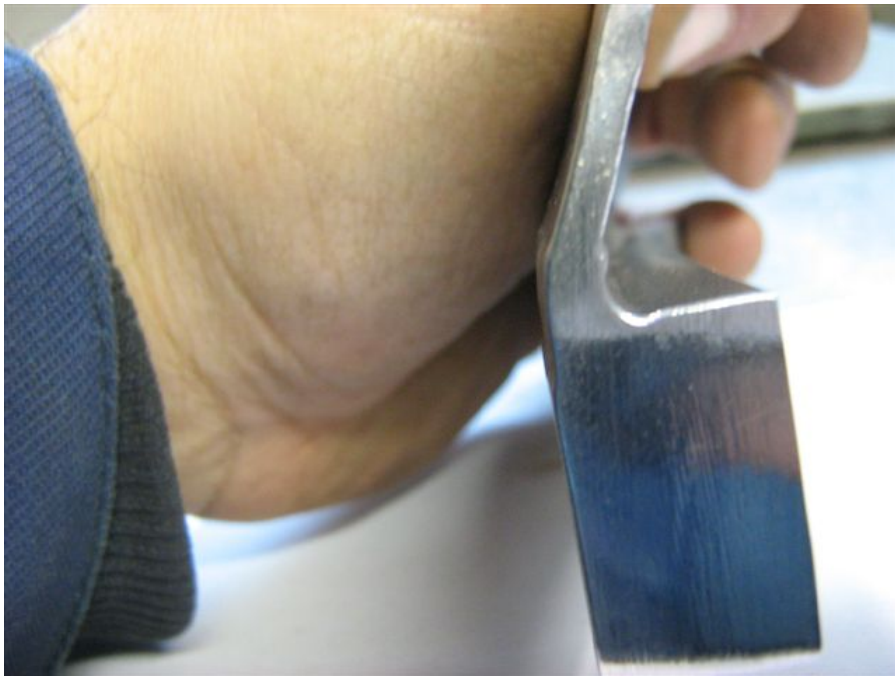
Test weldment of standard filter outer shell, with cutouts to inspect weld quality, which must be free of cavities.
